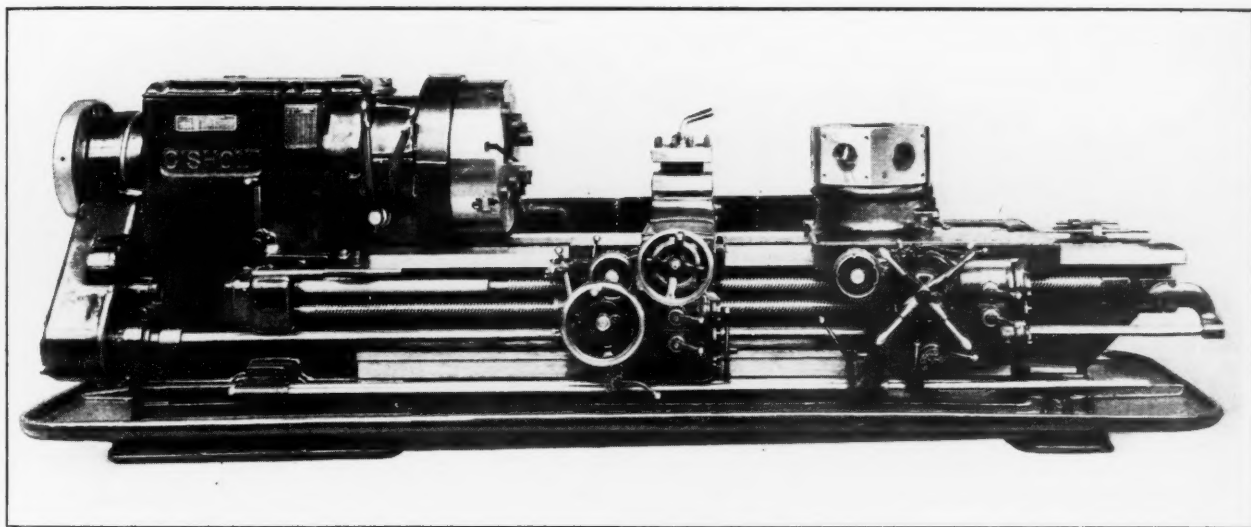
Gisholt 4L Turret Lathe equipped with a Fixed-center Turret
